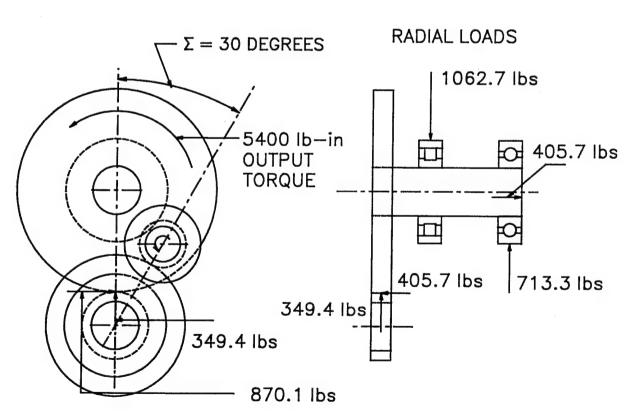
OUTPUT GEAR SHAFT LOADING FOR COMBINED HELICAL EXAMPLE
